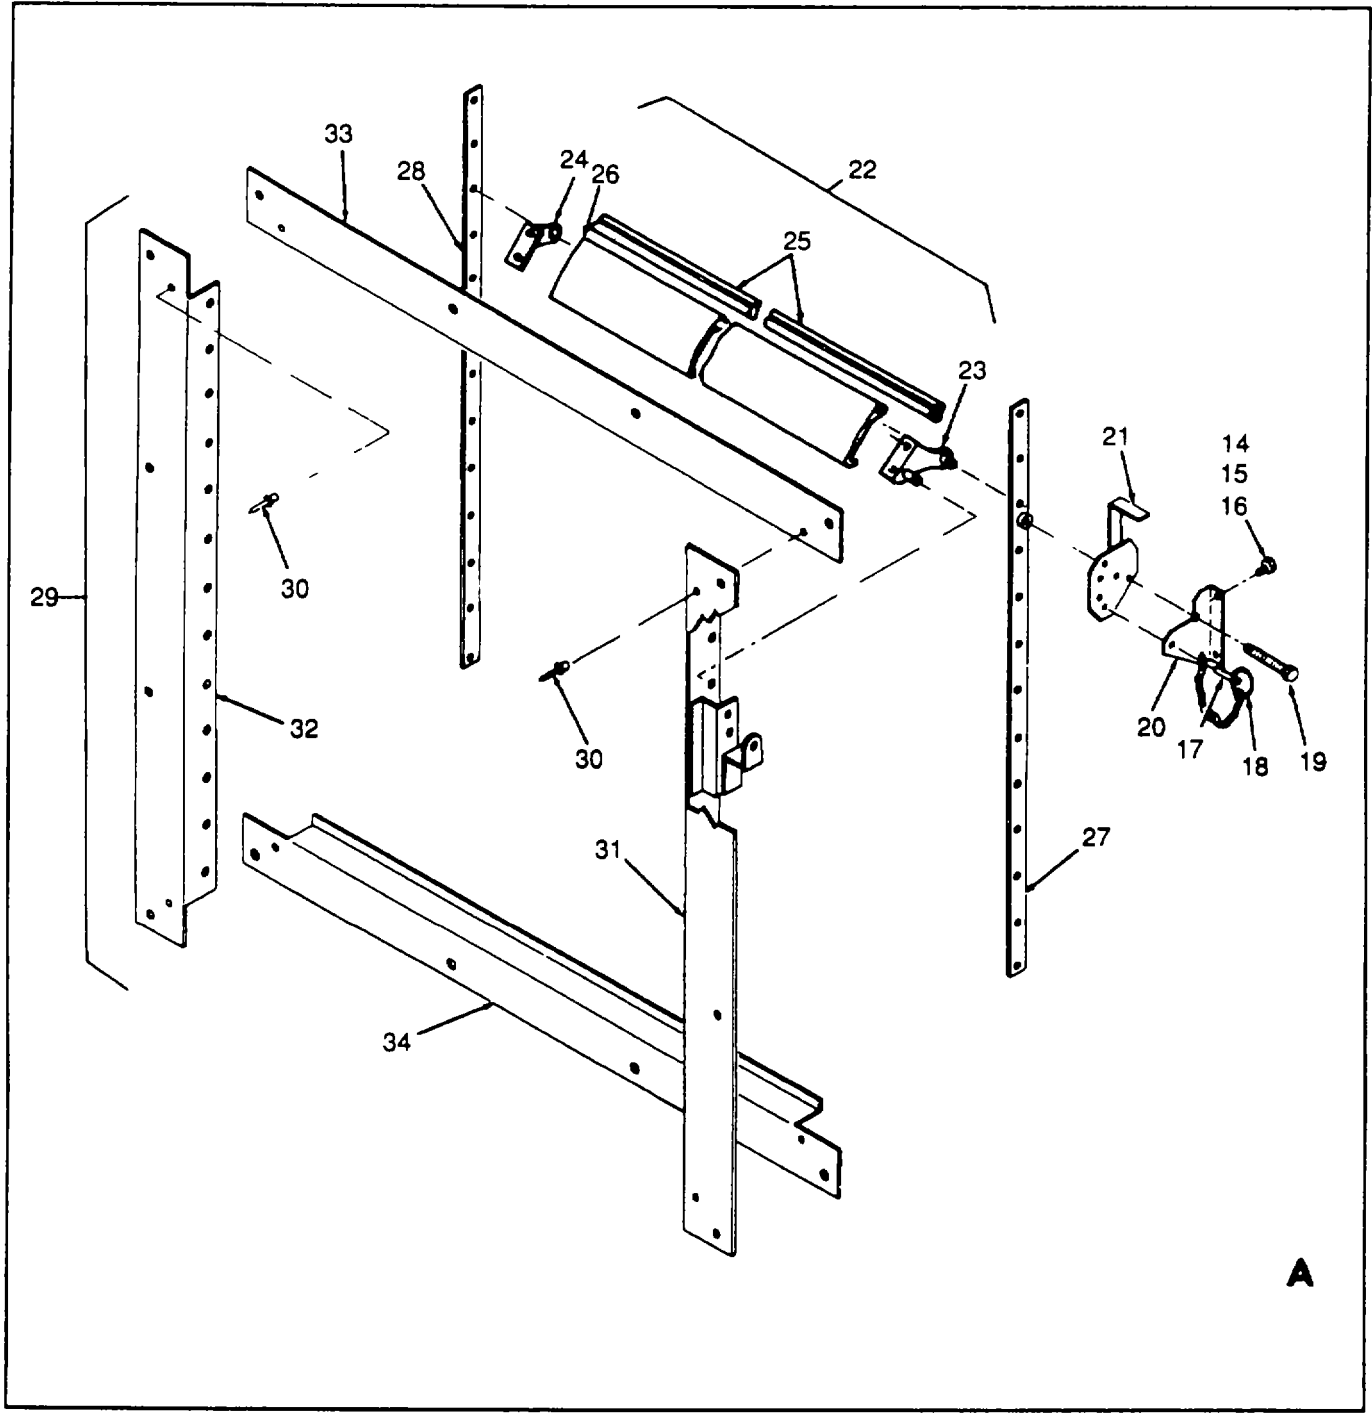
Control Room Door Assembly (Sheet 2 of 3)
